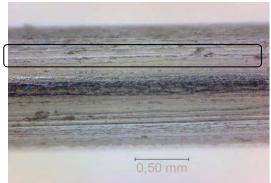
heavy surface damage (welding test on Item 17). It is a scored groove about 10 µm wide and 2 µm deep with raised edges for a length of about 80 cm.
